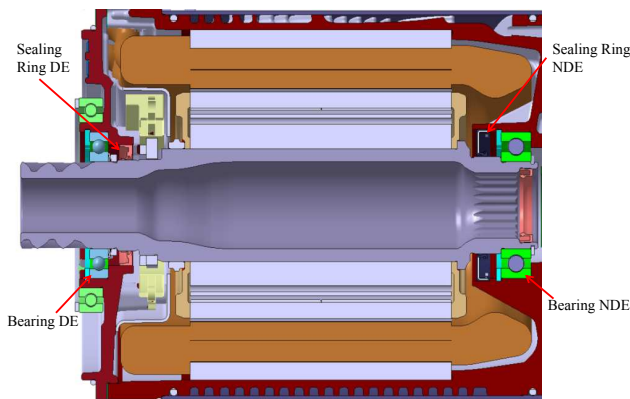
Electric drive cross section view, with location of bearings and sealing rings at NDE and DE.
